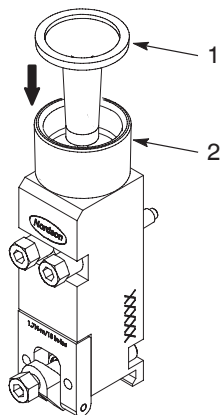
Using the base tool to push the needle-and-piston assembly into the module body
